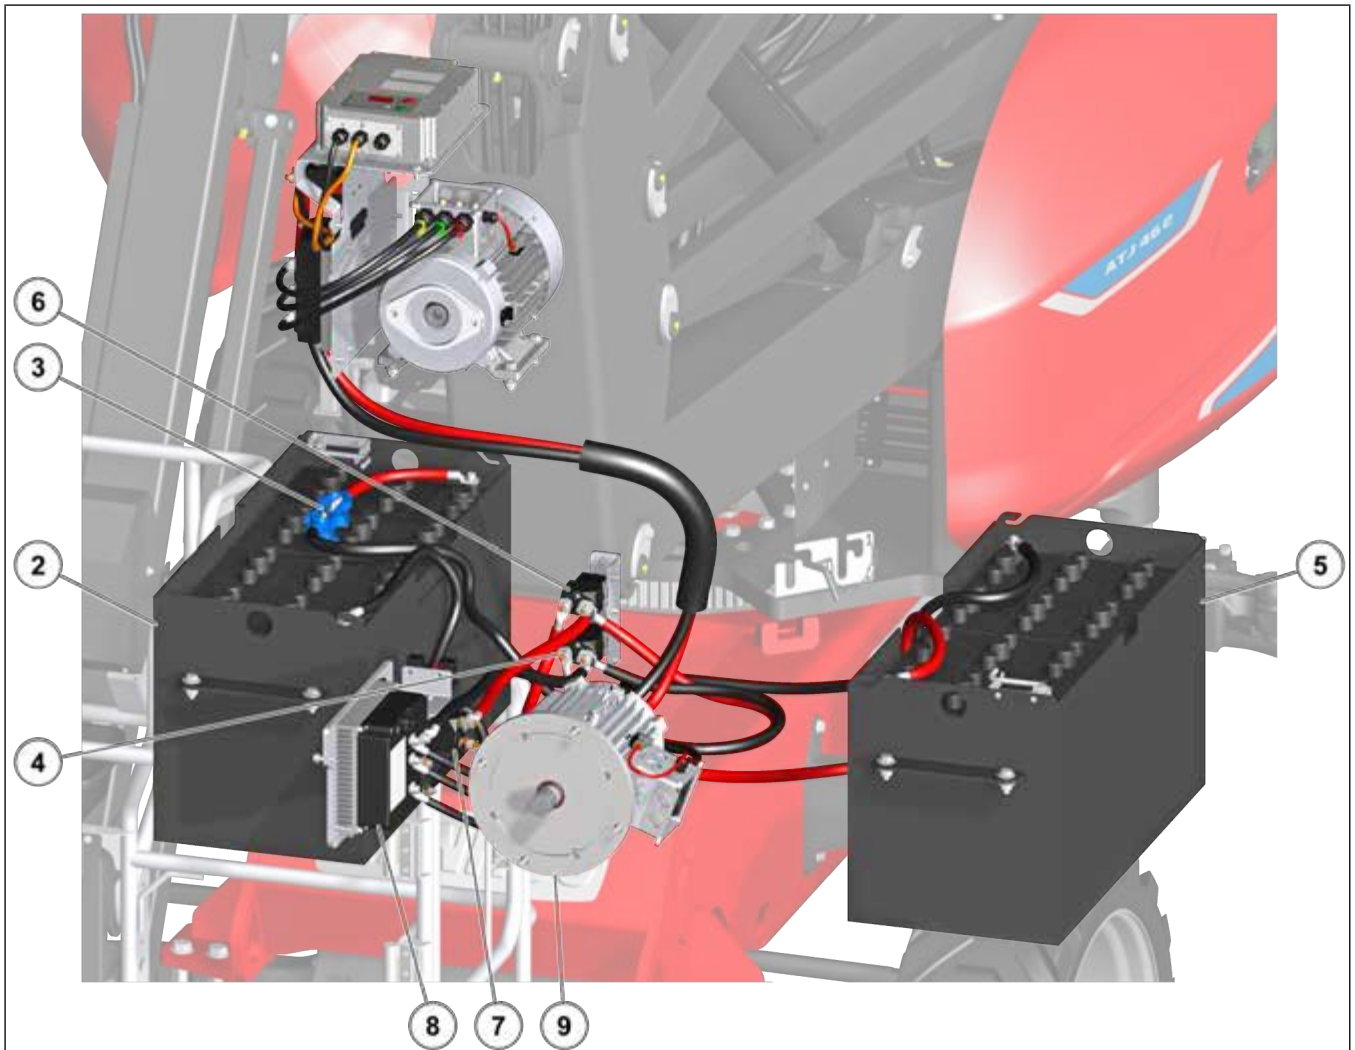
Checking cables and high-voltage electrical connections 2 - up to machine no. MAN00000J01101633
